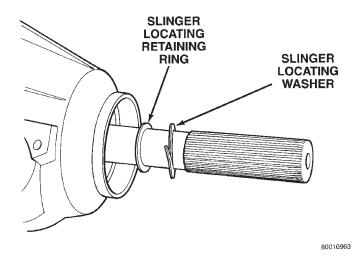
Slinger Locating Washer And Retaining Ring Removal
